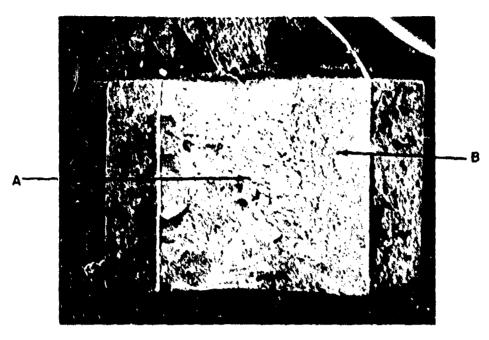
Fatigue fracture surface of a hydrogen-embrittled A-514 weld specimen, 10x.
